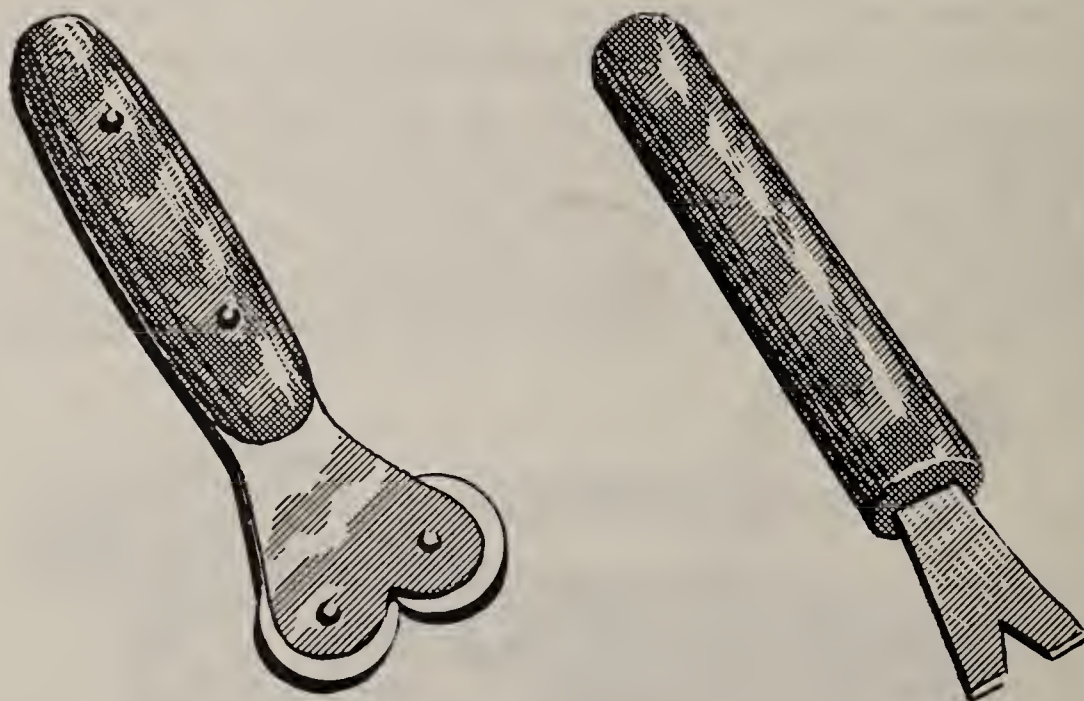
Two types of homemade burring tools. Tools of this type are rather simple to make, requiring only a piece of suitable sheet metal which is cut to suit and provided with a wooden handle. The circular cutters shown should be of hardened tool steel properly ground and with sharp edges.
